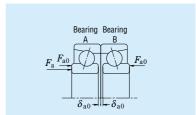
Back-to-Back Duplex Bearing Preload
